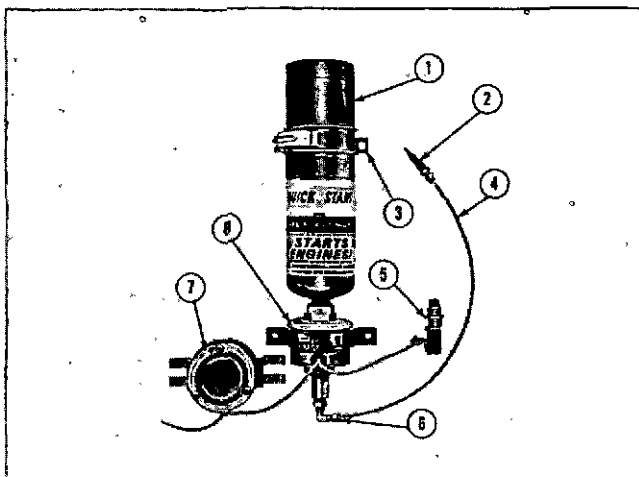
, V11012. Electric valve with fuel cylinder mounted
